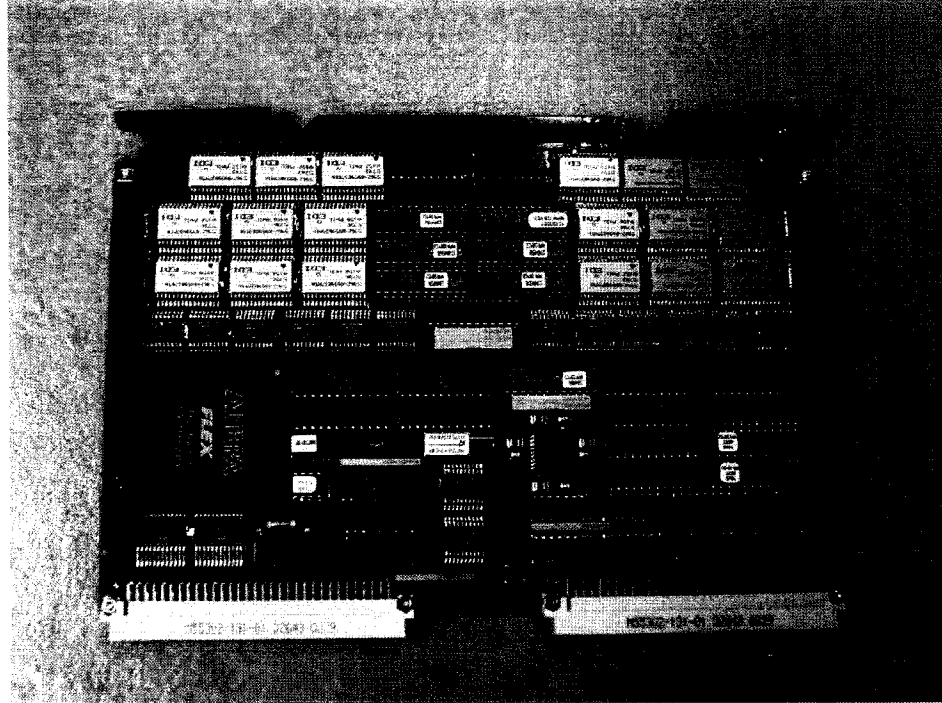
CCA Utilizing Combined Heat Ladder and PWB Core Cooling Scheme (Component Side)
